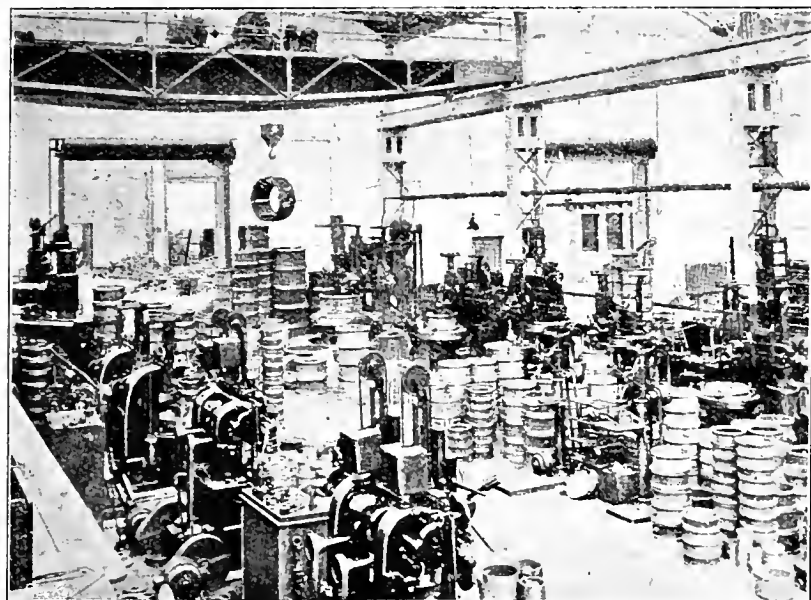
BORING AND TURNING MACHINES AND LATHES.
